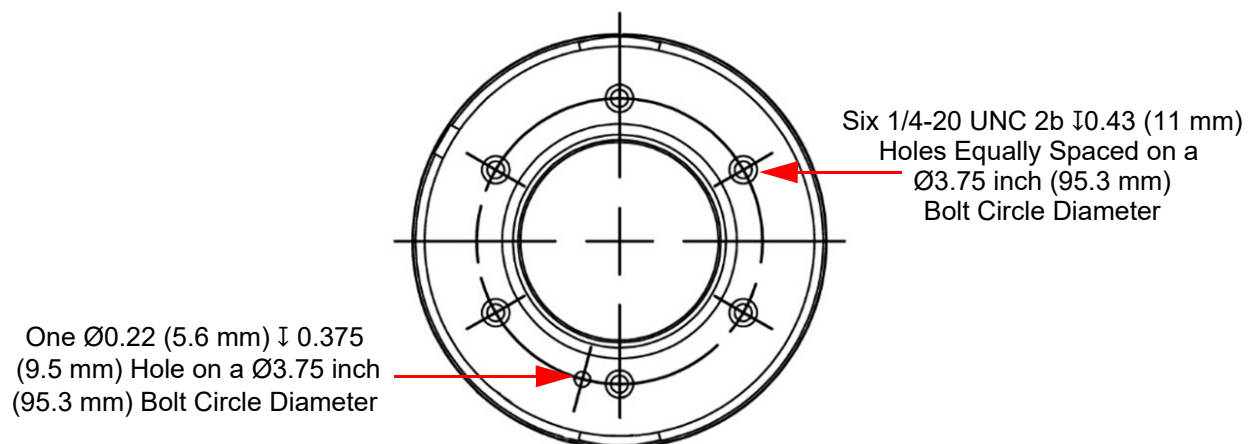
Mounting Hole Pattern (4-Meter Stiletto P/N: 711290461 Shown)
